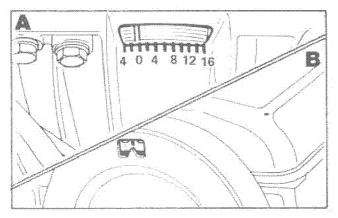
TDC Timing marks on flywheel (A), camshaft (B)
